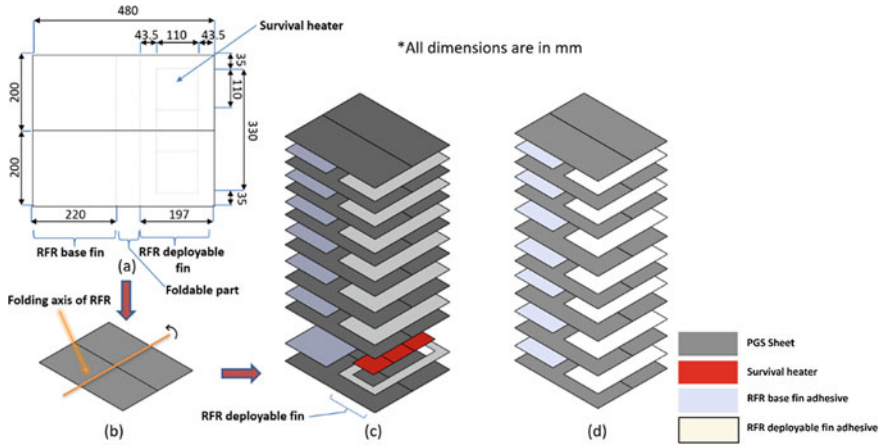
a Dimensions of RFR CAD model; b isometric view of RFR fin; c exploded view of RFR fin with survival heater (actual model) and d exploded view of RFR fin without survival heater (for numerical analysis purpose)
